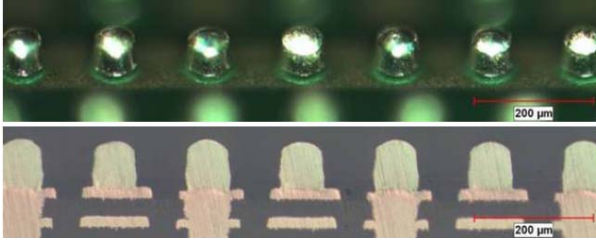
Side and cross-sectional views of IMS bumps on Cu OSP surface finish [41].
